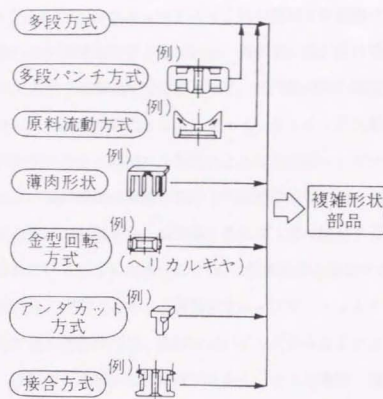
Compacting techniques of complicate-shaped machine parts<sup>18)</sup>
